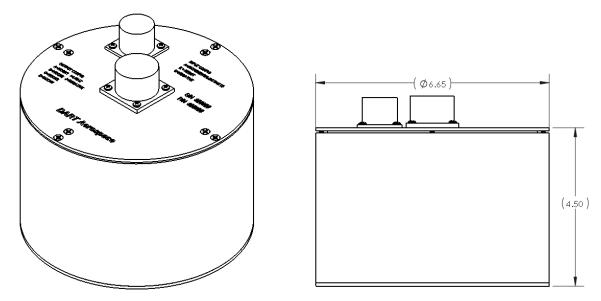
D104-AB and D106-AB Switching System Dimensions.
